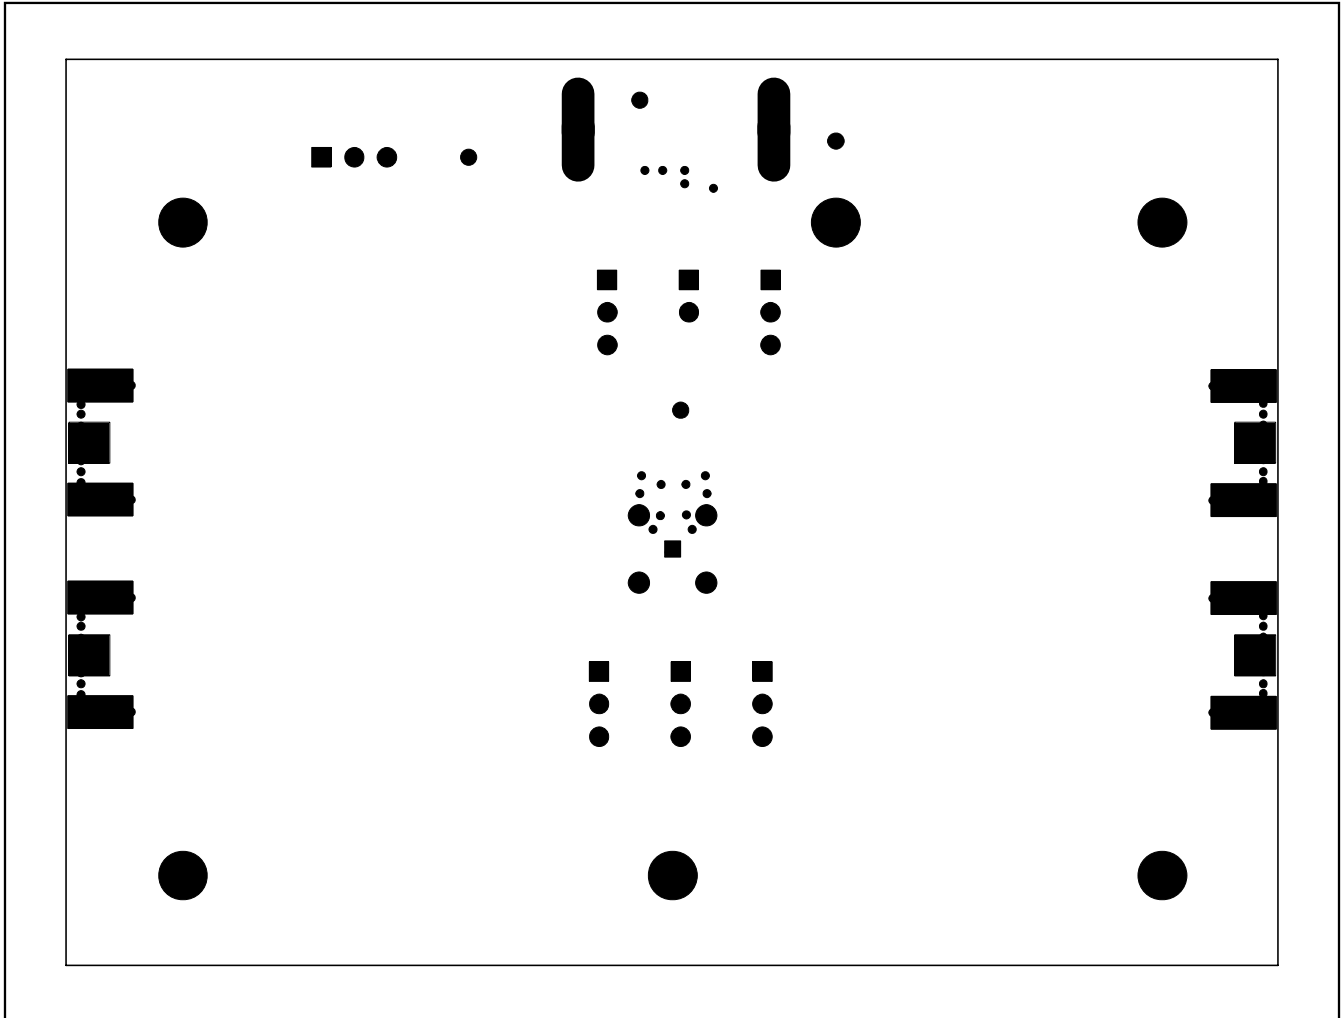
MAX3984 EV Kit PCB Layout—Bottom Side, Layer 4
